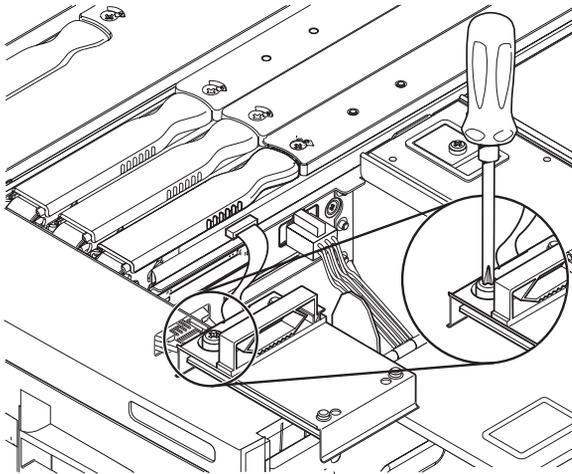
Tightening the SCC Reader Captive Screw
